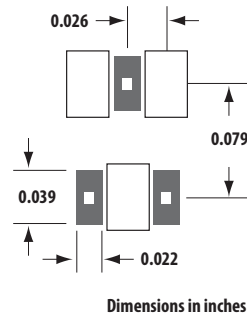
Recommended PCB Pad Layout for Avago's SC70 3L/SOT-323 Products.
